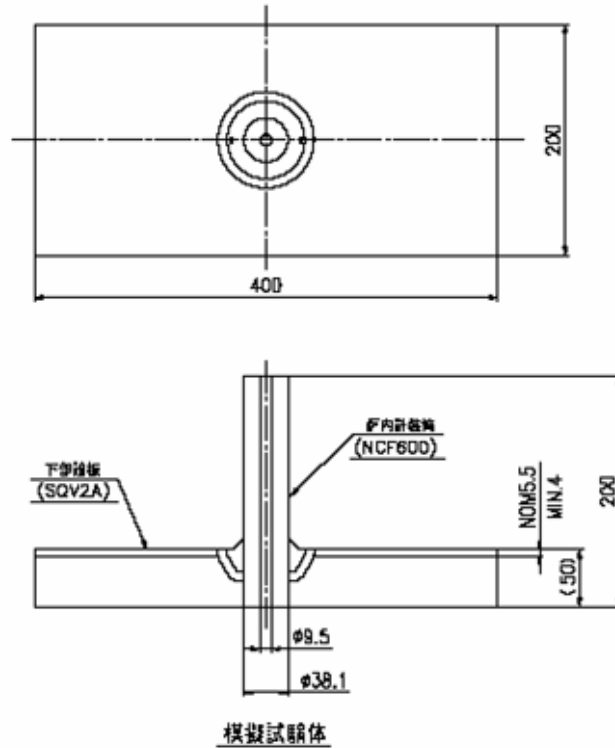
Drawing of Test Blocks PINC 5.13 through 5.16 from JNES
